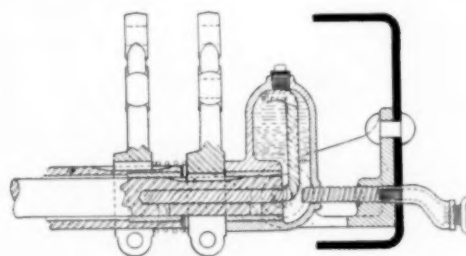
BRAKE-COUNTERSHAFT ASSEMBLY IN WHICH OIL IS EMPLOYED AS A LUBRICANT
